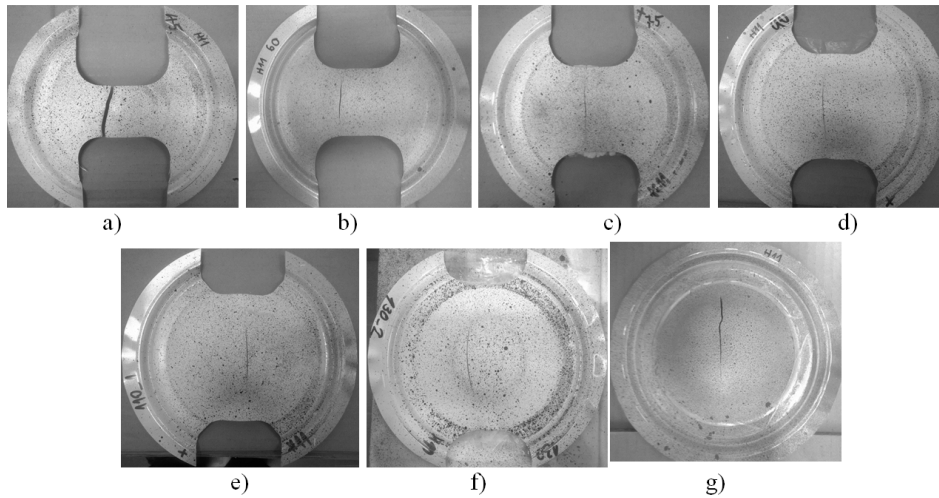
Fractured surfaces of AA5754 H11 specimens with different width (in mm): a) 45, b) 60, c) 75, d) 90, e) 110, f) 130, g) circular with diameter of 180 mm
